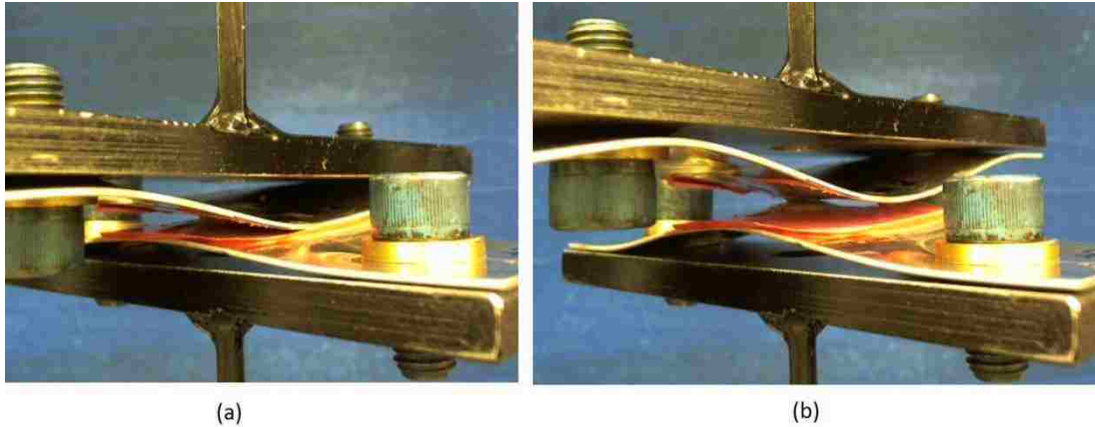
Tensile test of a 1.3 mm thick SPR cross tension joint. Crack propagation in the adhesive layer and asymmetric loading of the rivet (a); complete failure of the adhesive layer, rivet intact still holding load (b).
